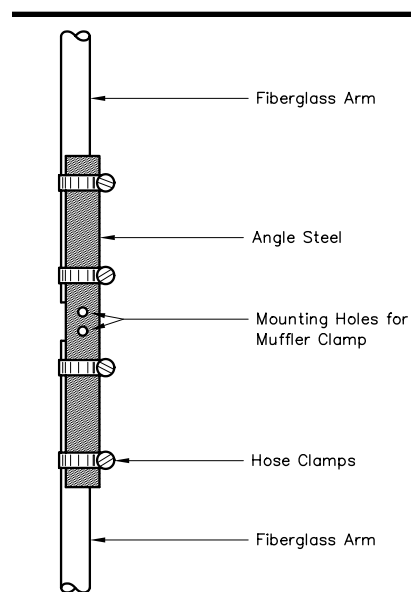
Details of one of two assemblies for a spreader frame. The two assemblies are jointed to form an X with a muffler clamp mounted at the position shown.
